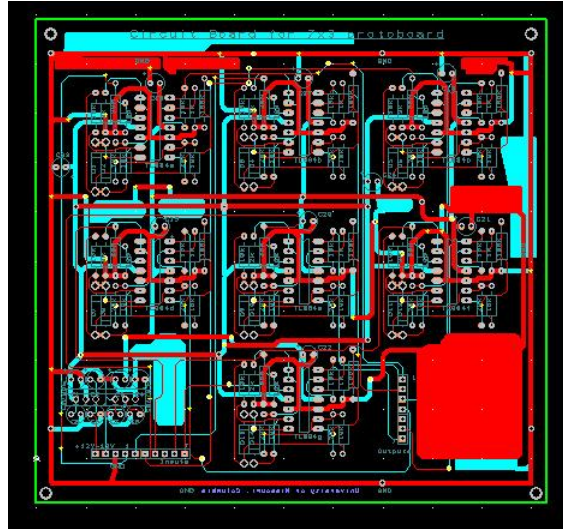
Printed Circuit Board layout for seven sensors in the 7x3 prototype board. This is a two layered board, the top layer is indicated by red color and the blue color indicates bottom layer. Three such Printed Circuit Boards were developed for the complete prototype board.
